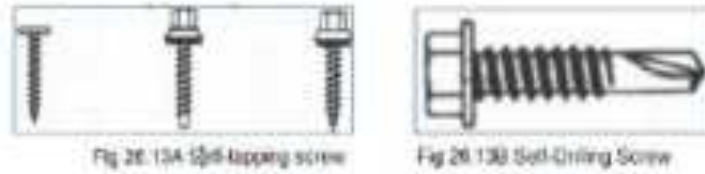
Aluminium Profile Industrial Troughed Sheet – Self Drilling Fastener
